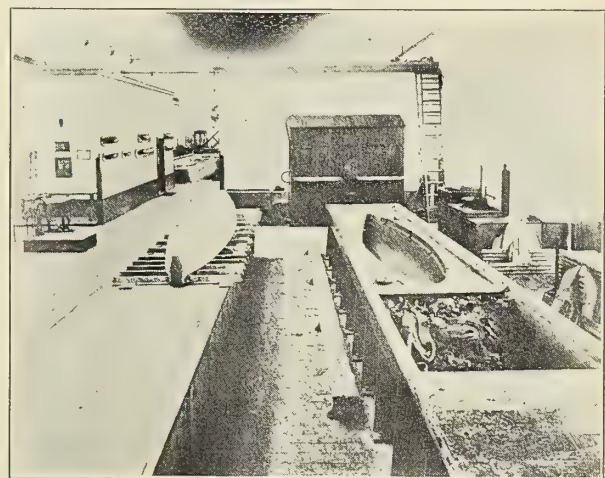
CLAY CASTING MOLD WITH FORM SCOOPED OUT AND CORE READY TO GO IN.
